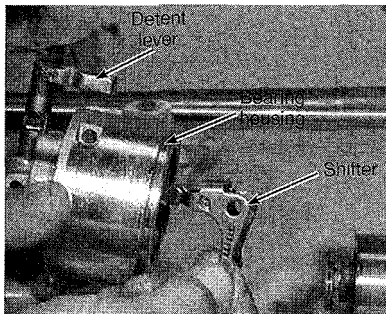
then reach inside the bearing housing and remove the shifter
